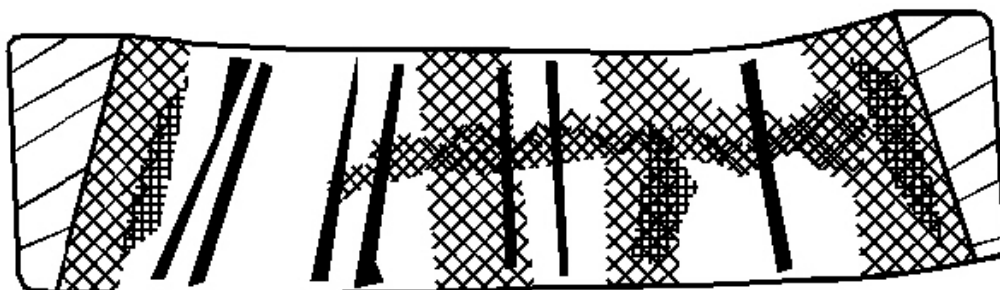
Inspecting Bearing Rollers & Races For Pitting, Grooves, Spalling & Excessive Wear
